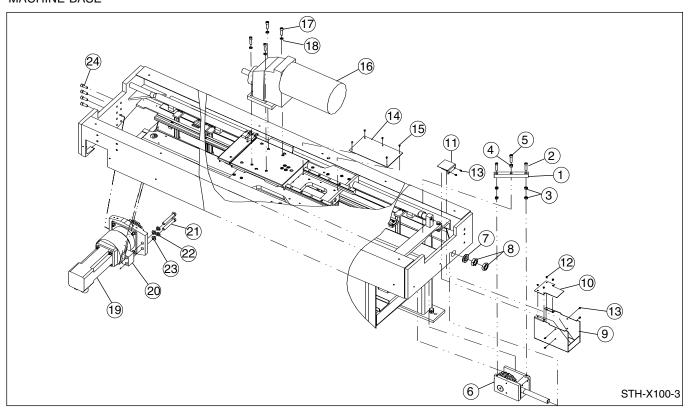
FIGURE A - TUBE HONE MACHINE BASE ASSEMBLY (3 of 8)
